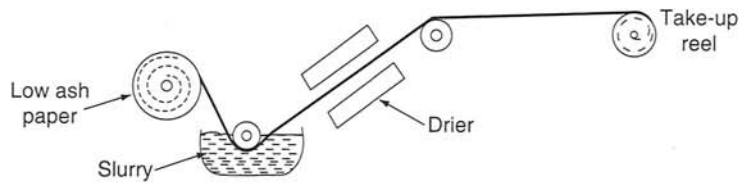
Schematic illustrating the paper-casting tape-forming process.
